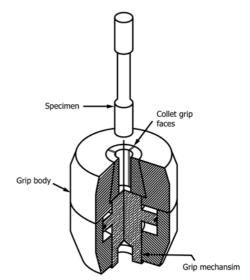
Example of a Smooth, Split-Collet Active Gripping System for Cylindrical Test Specimens
